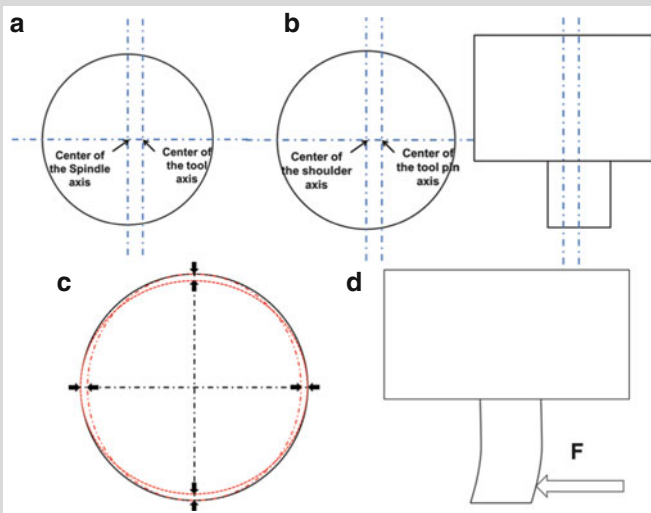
The different sources of tool run-out in friction stir weld (a) shift between spindle and tool axis, (b) shift between the center of tool pin and shoulder, (c) non-parallel spindle and tool axis resulting in wobbling, (d) Pin bending (possible in tools with long pin)
